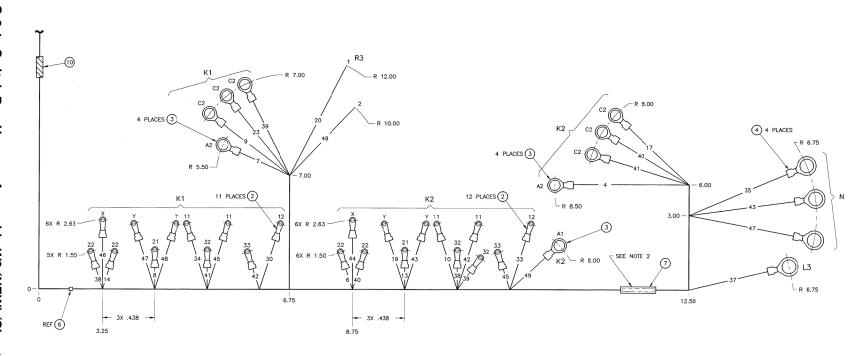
Switch Box Harness Assembly W9 (NEW) (Sheet 2 of 4).
